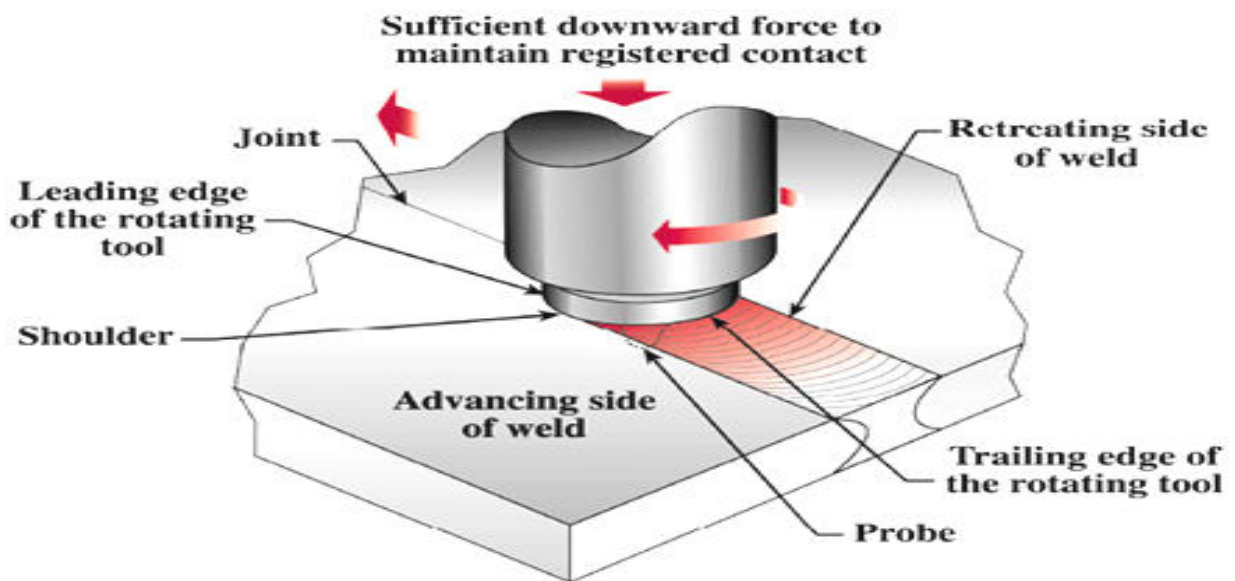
Schematic representation of FSW of a butt joint [4].
